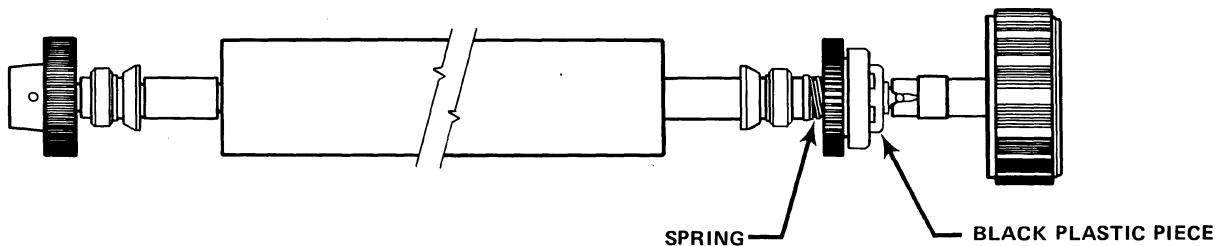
ZERO-BACKLASH PLATEN ASSEMBLY
